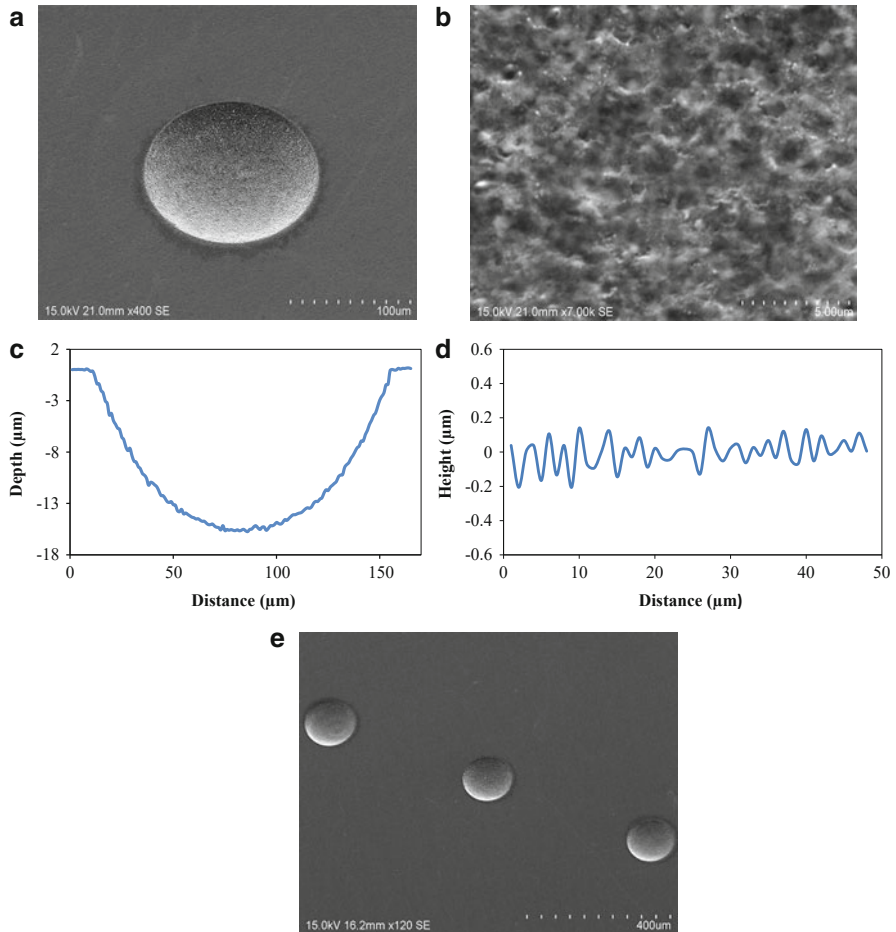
Machined micro dimples obtained with hybrid process: (a) a single dimple, (b) magnified view of dimple surface, (c) cross-sectional profile of dimple, (d) surface roughness profile of dimple, and (e) dimple array (3×1)
